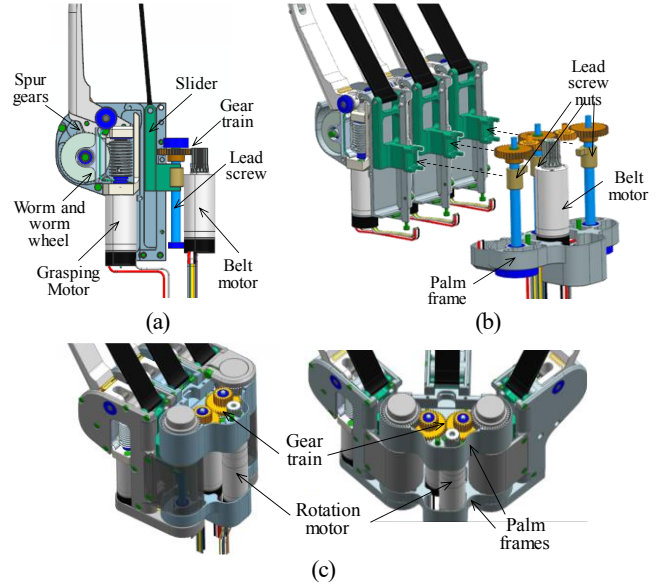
(a) Finger flexion and slider mechanism. (b) Exploded view of the palm frame and the finger part. (c) Finer rotation mechanism.
